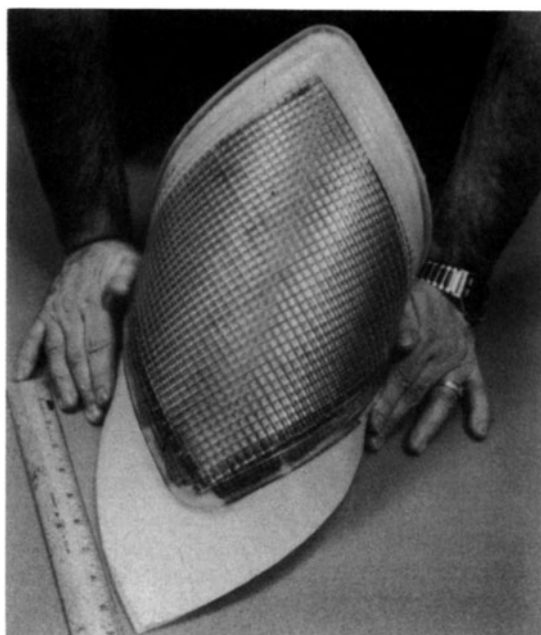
PARIS inspection of AV-8B wing skin impact damage
